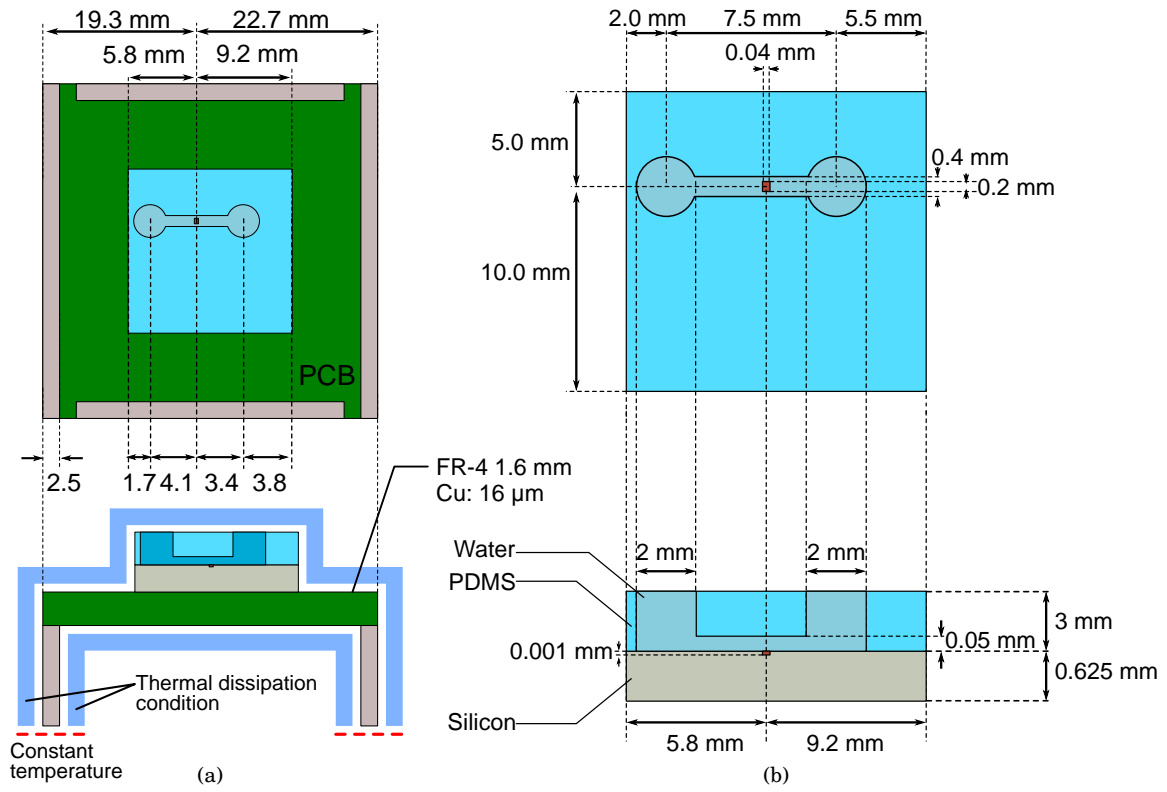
Dimensions of (a) a PCB and (b) silicon device.
